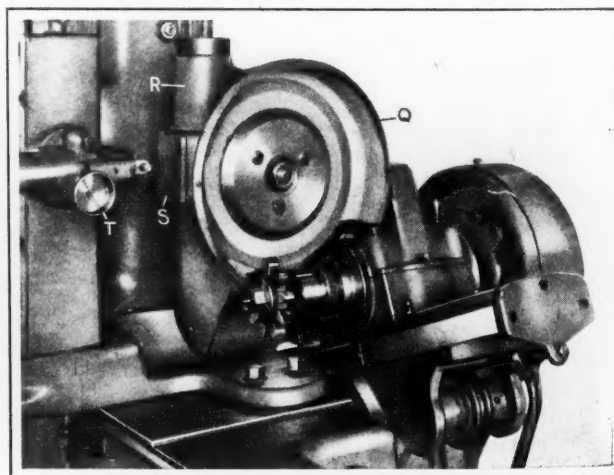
Close-up View of the Work, Grinding Wheel, and Truing Diamond
